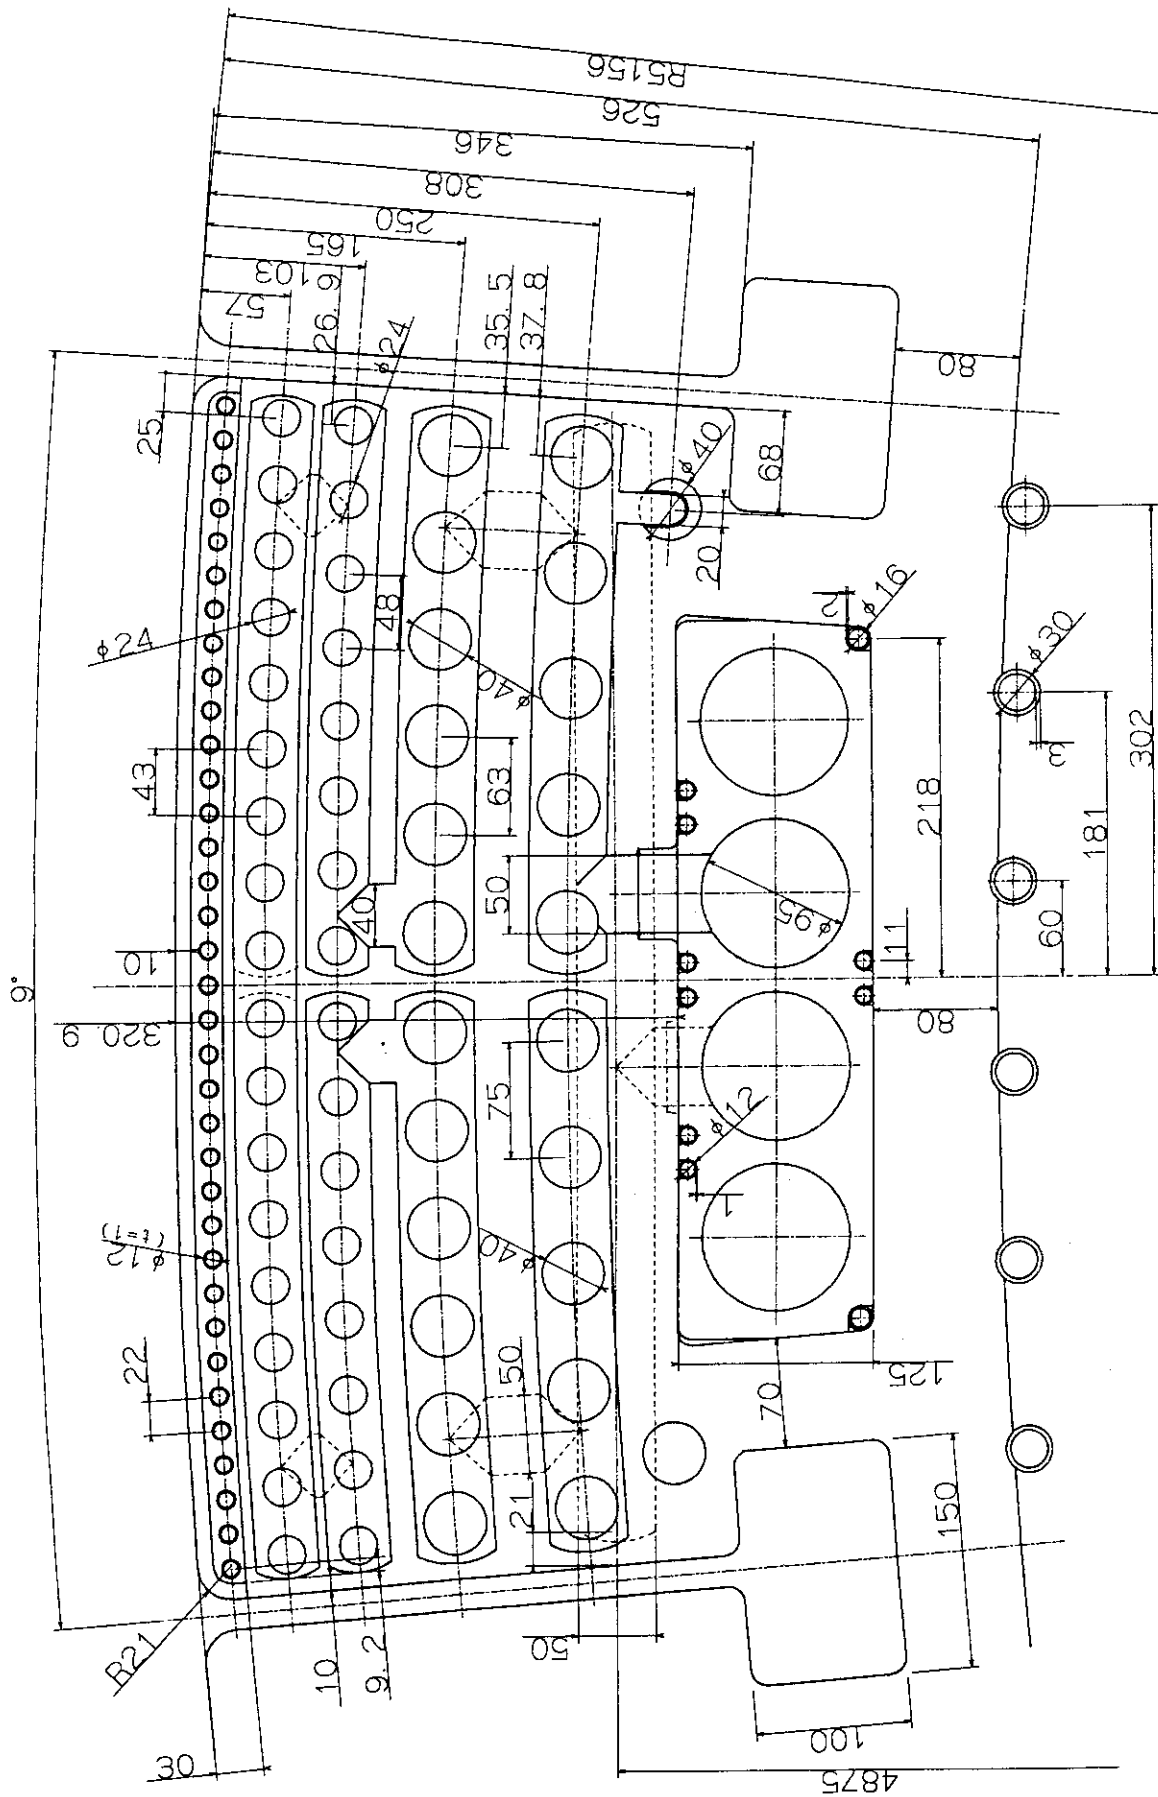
A Cross Sectional View of the Inboard Blanket Module
